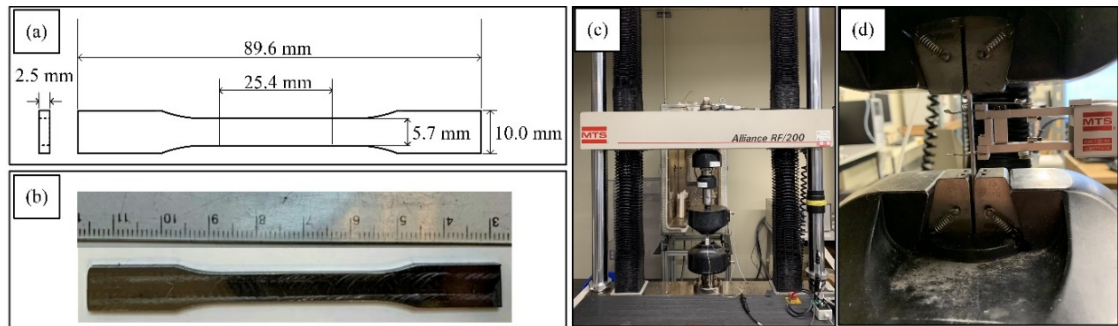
(a) Sketch of the tensile specimen, (b) machined tensile specimen from the rectangular sintered sample, (c) general view of the tensile test machine, and (d) zoom in on the specimen gauge section showing the jaws and extensometer
